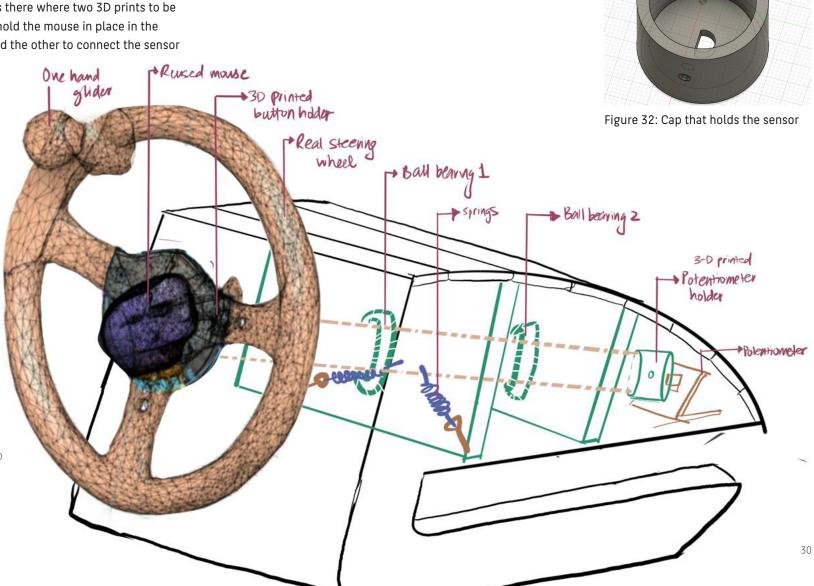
Full Sketch with 3D Print design of the mouse mounting case
